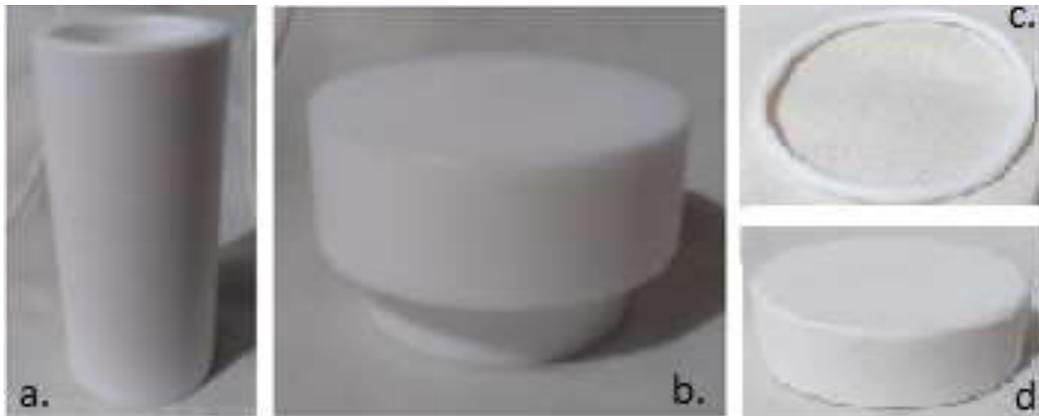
Reactor a.- Body, b.- Top, c.- O-ring, d.- Compression disk.
